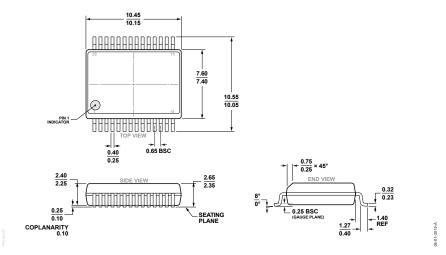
28-Lead Standard Small Outline, Wide Body, with Finer Pitch [SOIC\_W\_FP] (RN-28-1) Dimensions Shown in millimeters
